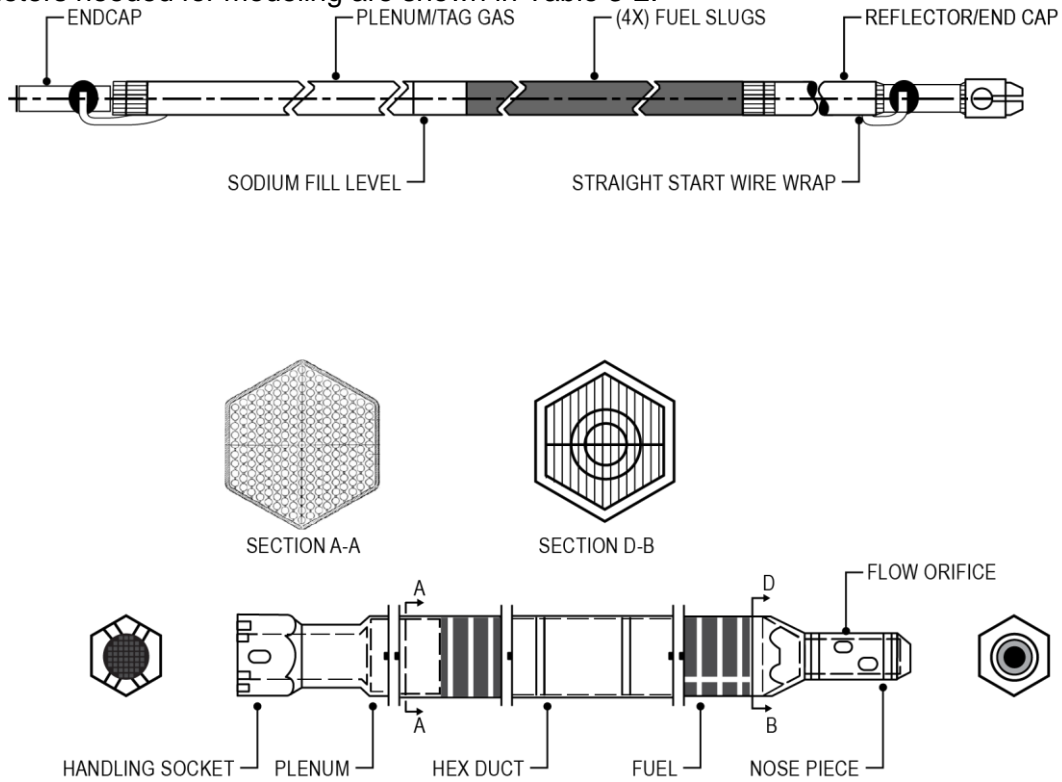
Sodium fuel rod and assembly design (Cheng, 2018)
